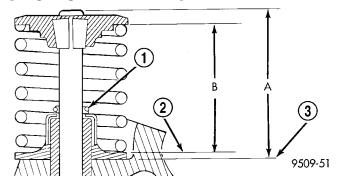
Checking Spring Installed Height and Valve Tip Height Dimensions
